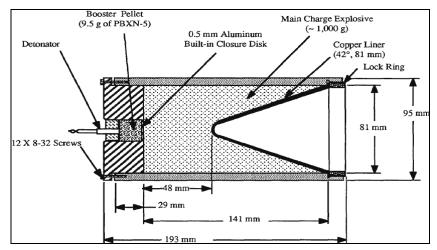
Example of GTU Drawing - 3.2" Generic Shaped Charge Testing Unit (BIRD v1.2)
